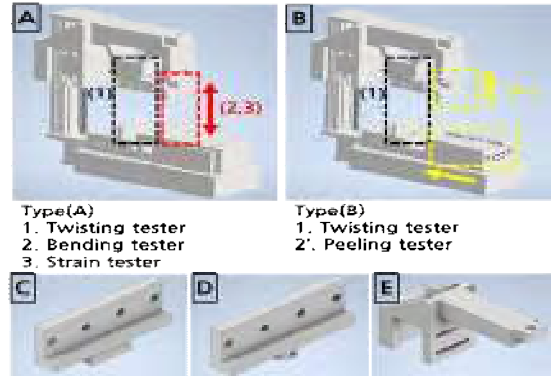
Multi-tester setup (A). Twisting, Bending and Strain tester. Multi-tester setup (B). Drawing of Twisting and Peeling tester. Part to be made of Aluminum (C), (D) Zig part, (E) Arm part
